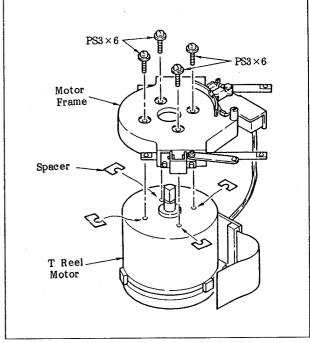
Correcting the Deviation of the Reel Motor Shaft (2)
